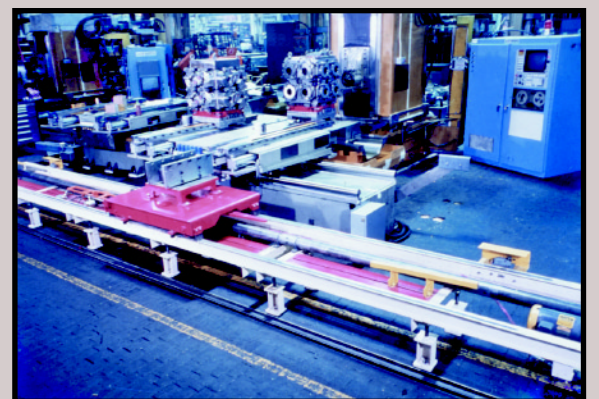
In the operation above a CARTRAC-MD carrier interfaces with a CNC machine.
